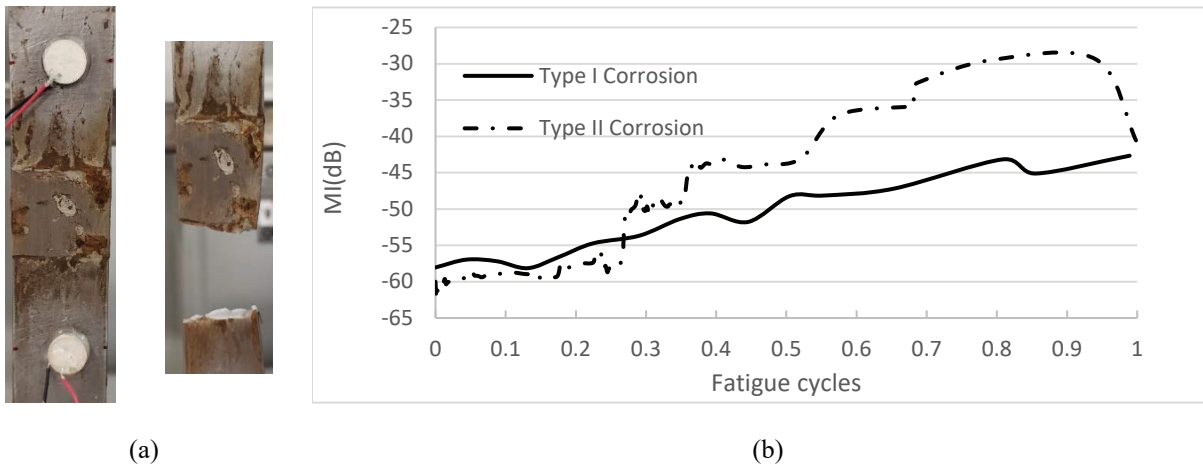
Corroded samples test results, (a) corroded sample type II specimen and fractured (b) MI evolution in two type corroded specimens
